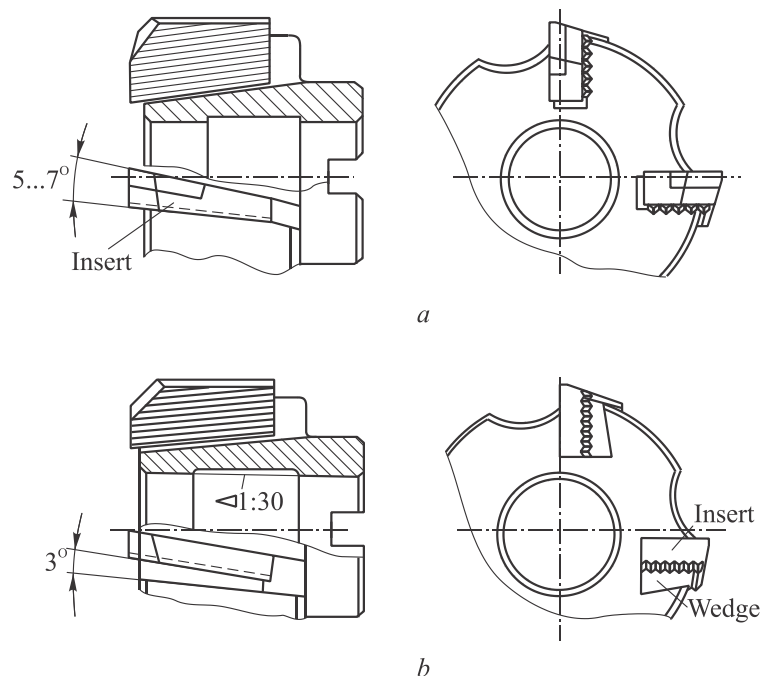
Inserts clamping: (a) wedged serrated inserts; (b) flat inserts with wedges
